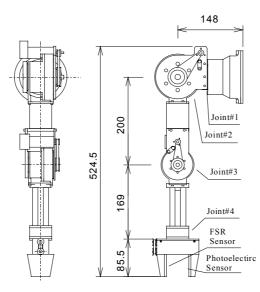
Assembly draw of WAMOEBA-2R Arm-Hand Mechanism
